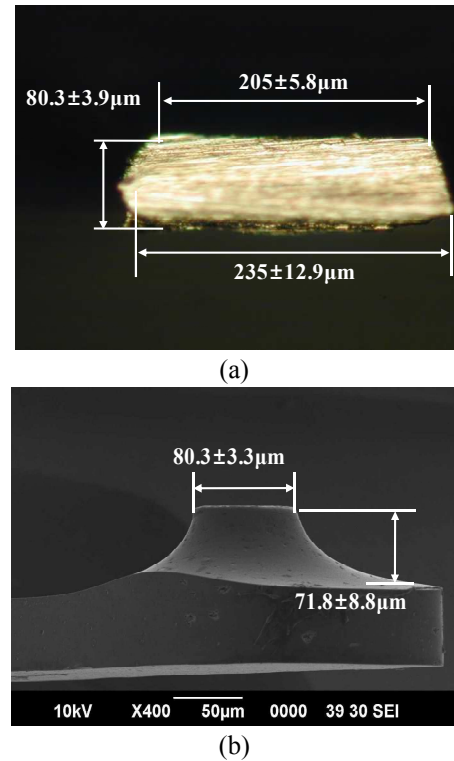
Side view of the fabricated probe: (a) Cross-sectional view of the cantilever; (b) Side view of the tip on the cantilever
